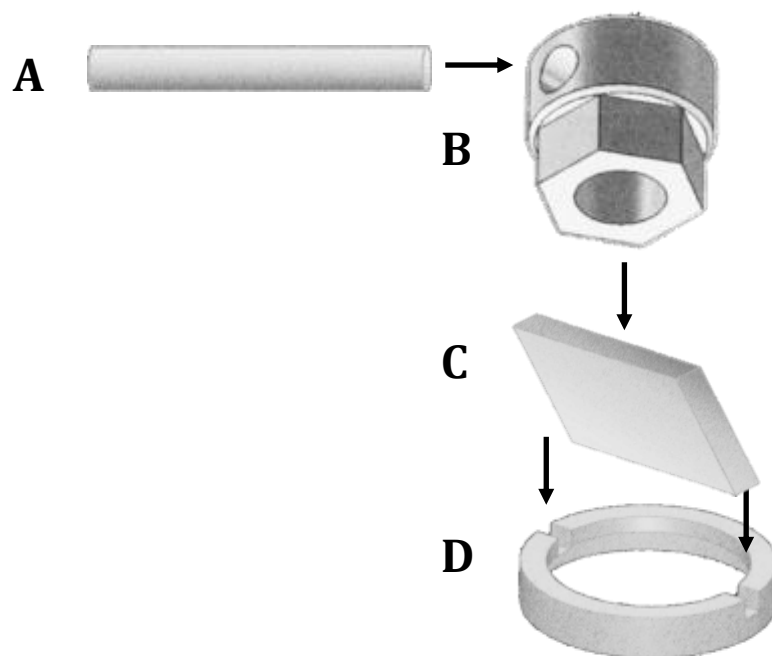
Schematic representation of interlocking tools used to seal prototype I pressure cell A) Nut tool handle slots into a B) window nut tool. This attaches onto the C) metal block which slots into custom designed grooves on the D) metal nut ring. This tightens the thread and compresses down the components of the chamber creating a seal that enabled the cell to be pressurised.
